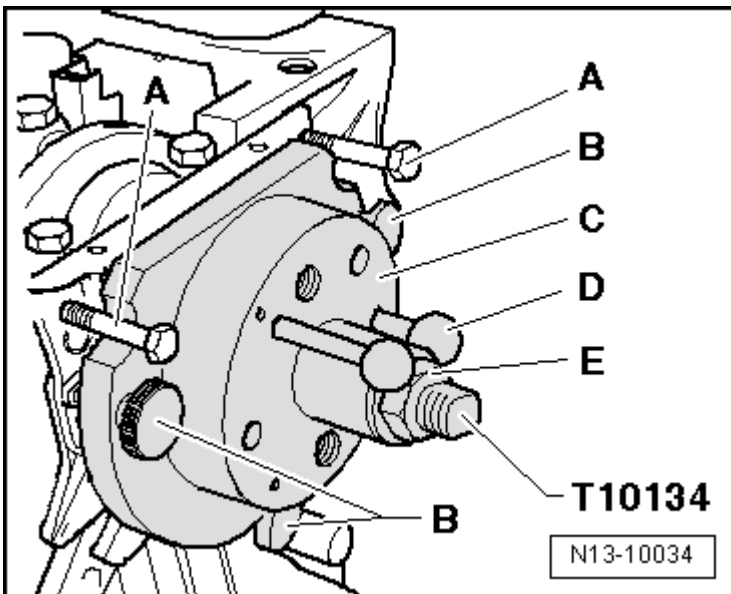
Identifying Installed Position Of Sensor Wheel On Crankshaft
